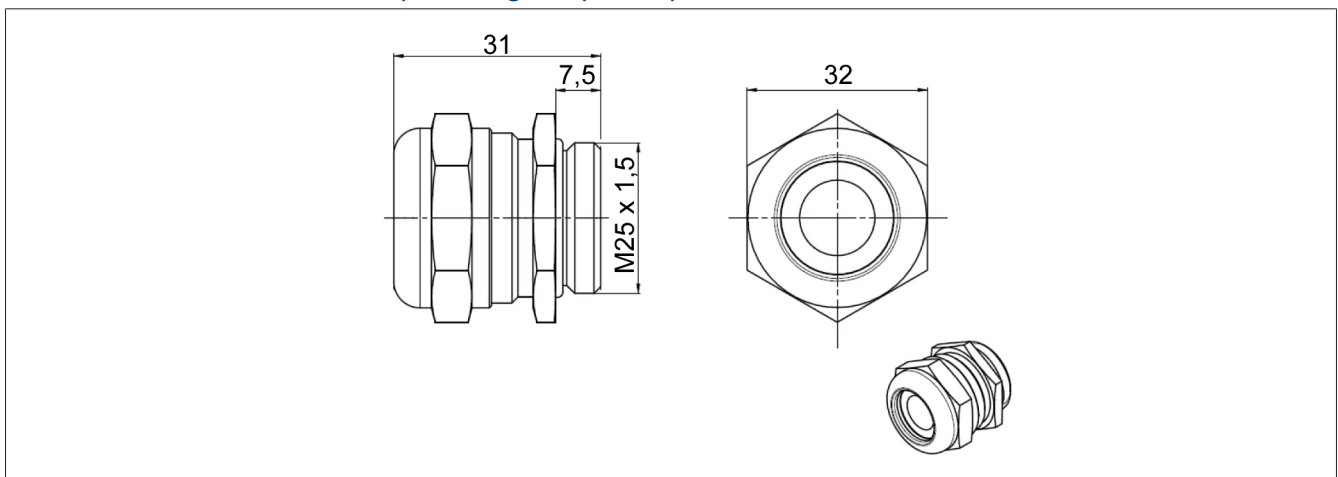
WADI cable screw connection; material: nickel-plated brass; clamping range 13...20 mm
